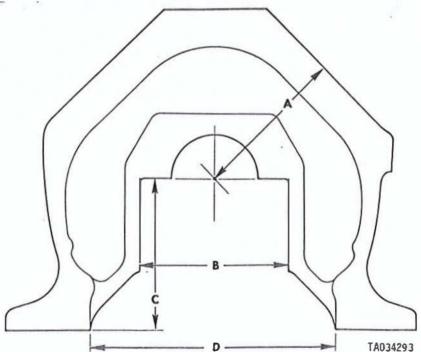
Points of measure for checking crankcase before and after welding repair.
